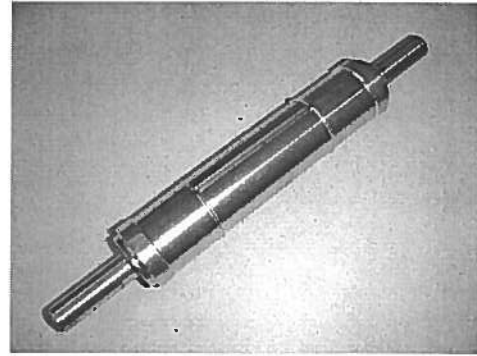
Laser consolidated CPM-9V rotary cutting die after final sharpening.
